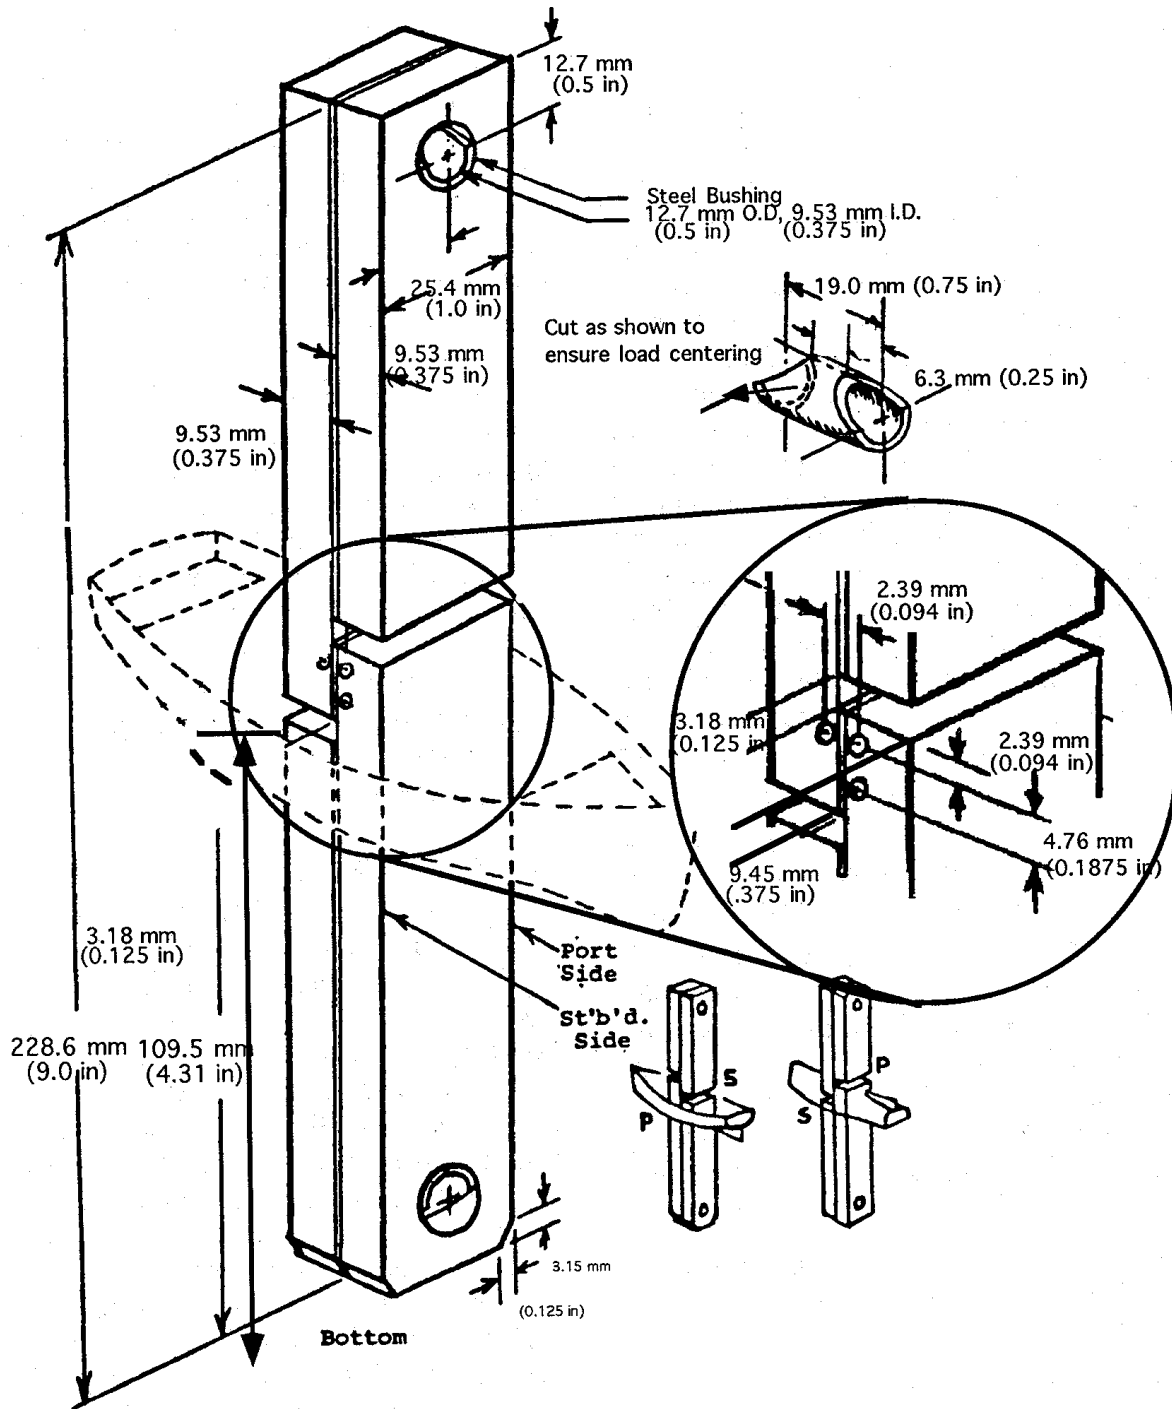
ASTM D 5656 SPECIFICATIONS FOR SPECIMEN DIMENSIONS
